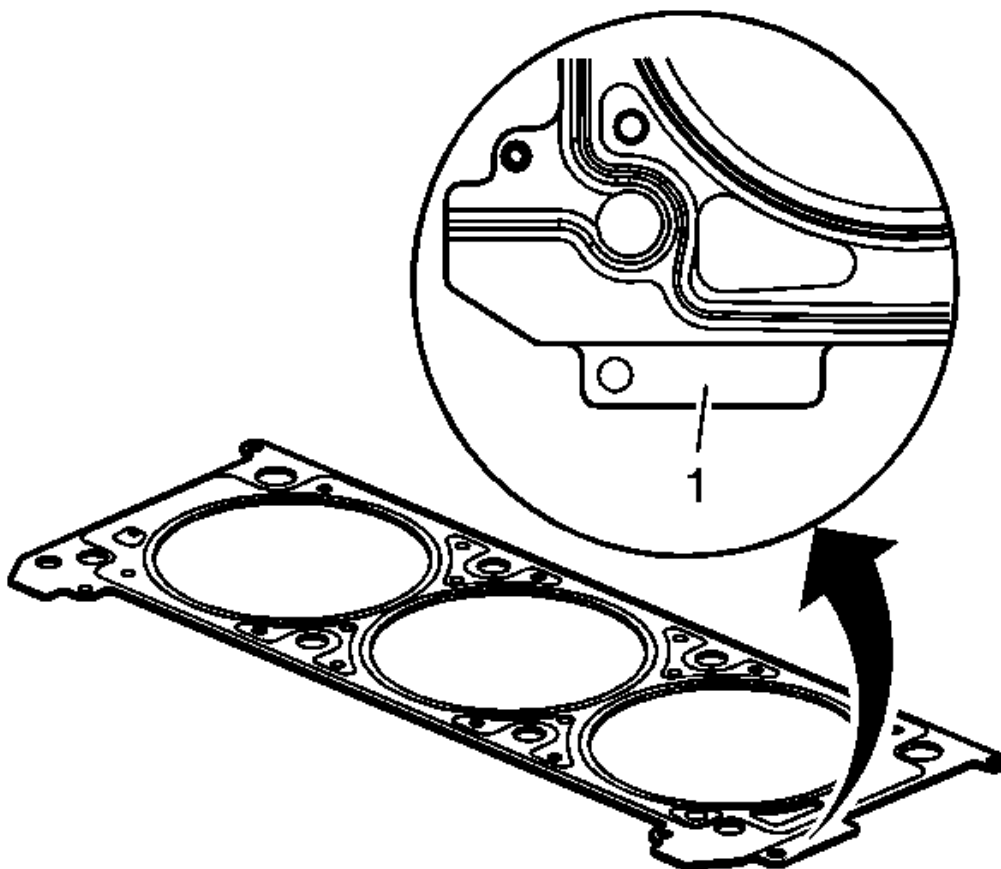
Identifying Proper Cylinder Head Gasket Installation
